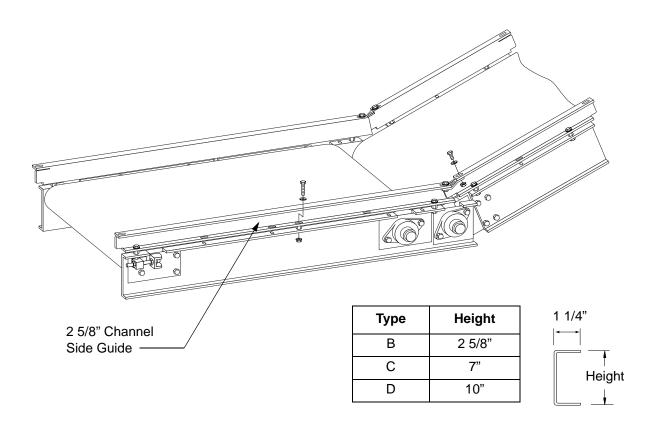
Power Feeder, Inclined, with 2 5/8" Channel Side Guides; Spaced Mounting
